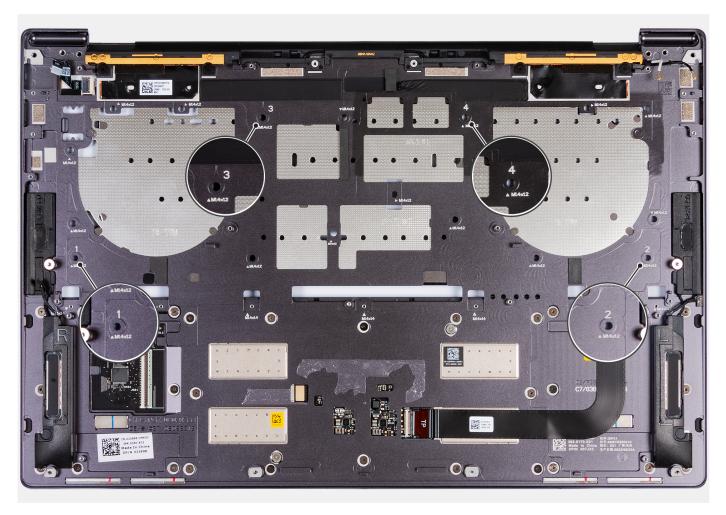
Installing four screws in sequence when securing the keyboard to the palm-rest assembly
